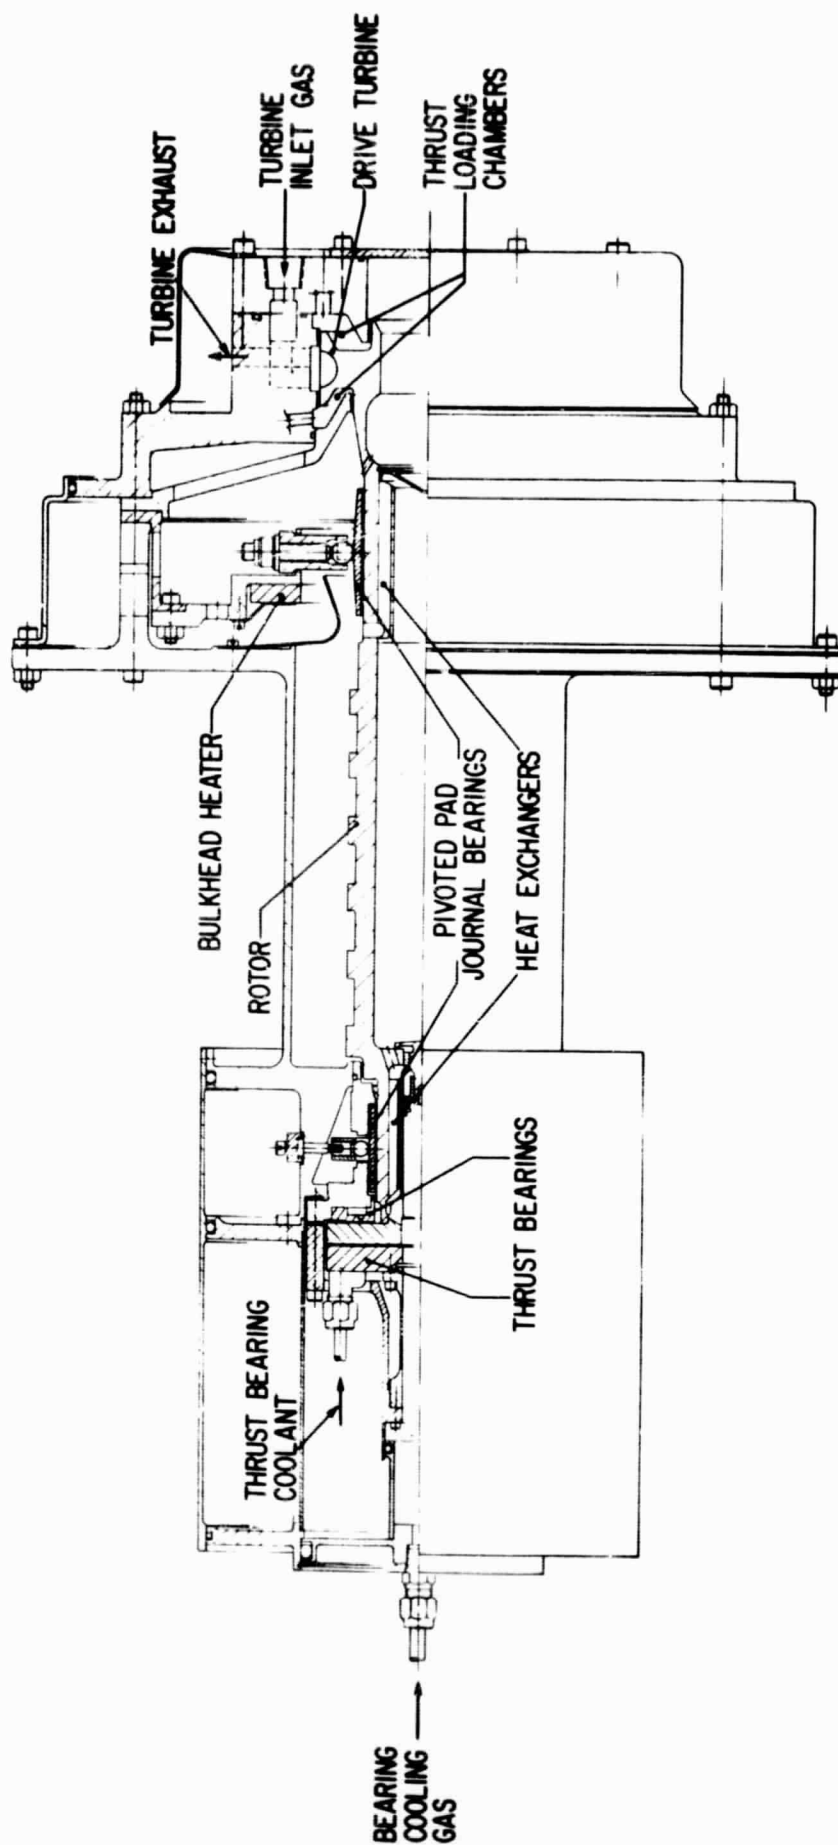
Cross-Section View of Rotor-Bearing System Simulator
